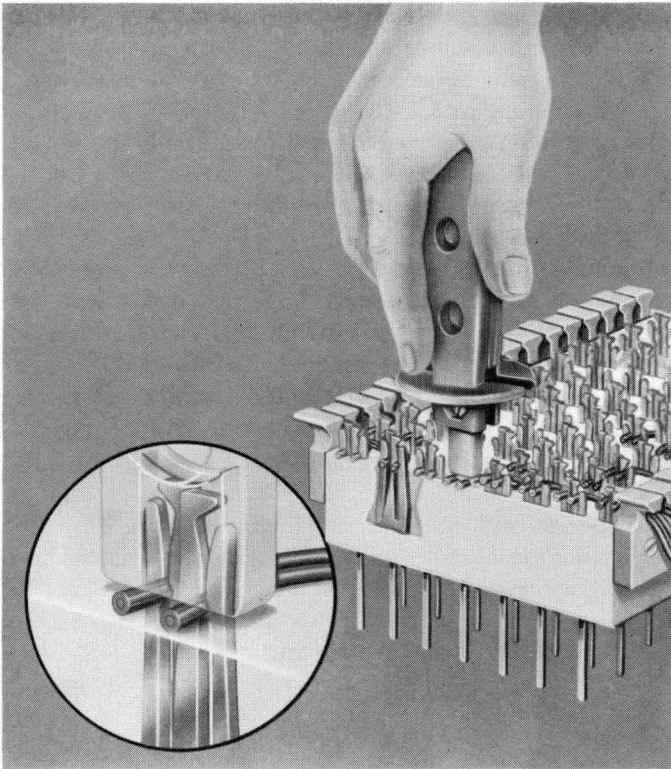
Distributing frame connecting blocks and insertion tool.
